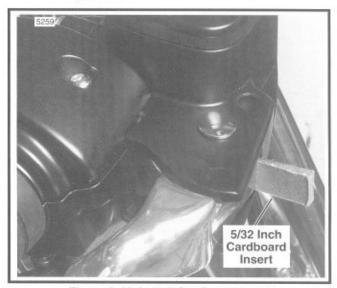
Install Cardboard Insert Before Removing Master Cylinder Assembly
